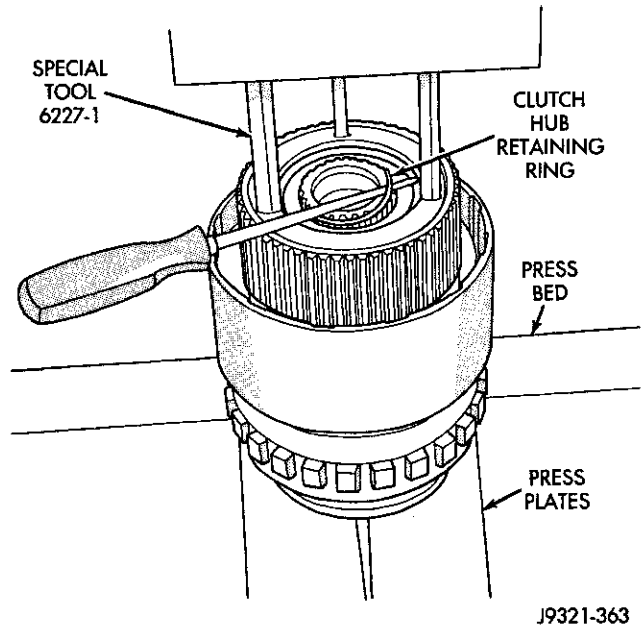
Direct Clutch Hub Retaining Ring Removal
